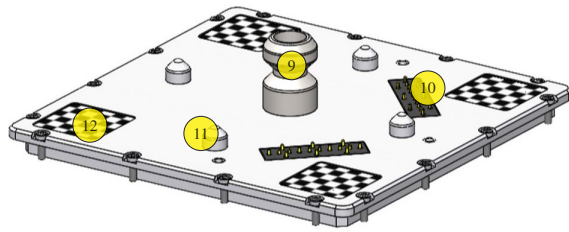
EMI-MOD passive side with 9) central bolt, 10) connector with spring-loaded contact probes, 11) guiding pin and 12) marker
